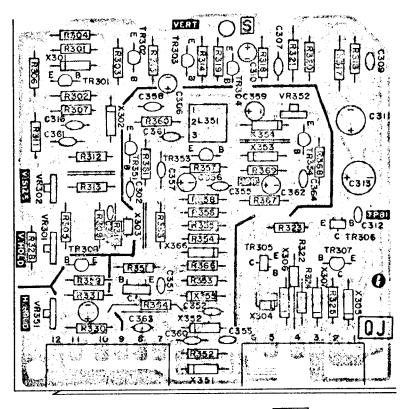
HORIZ/VERT P.C. BOARD MT/QJ
